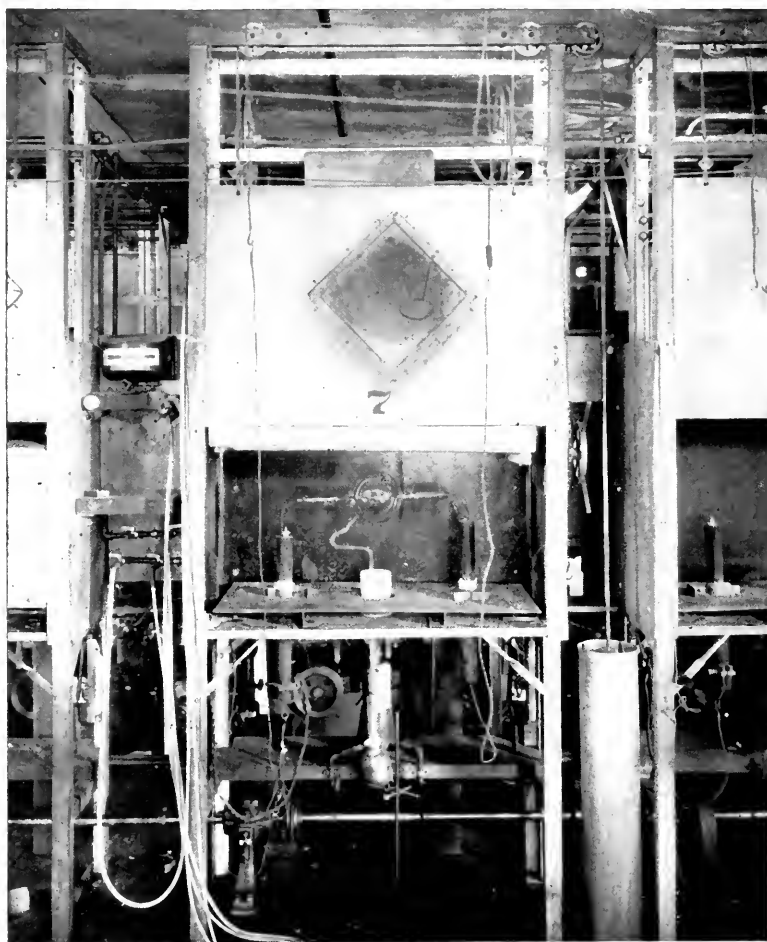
EXHAUST OVEN FOR UNIVERSAL TYPE TUBE WITH TUBE IN POSITION.
